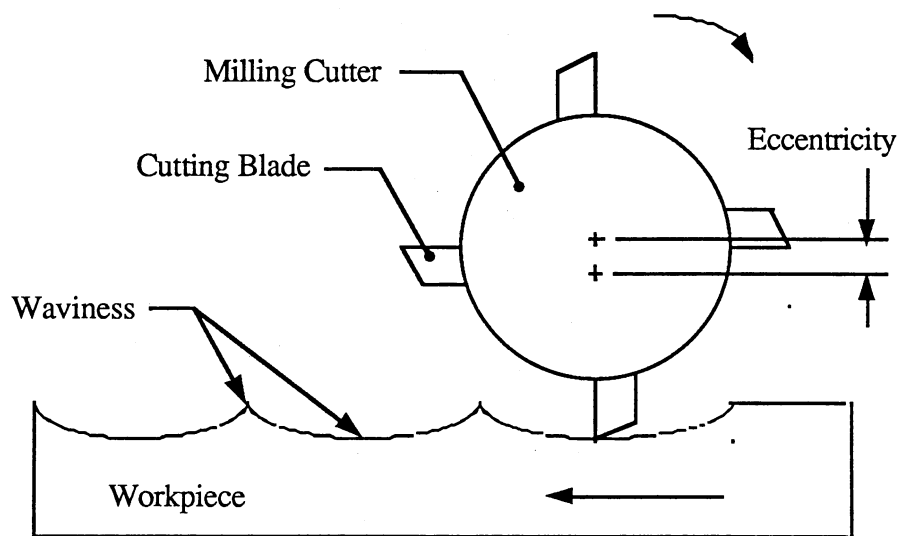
Waviness Generated on Surface of a Machined part as a Result of Runout
